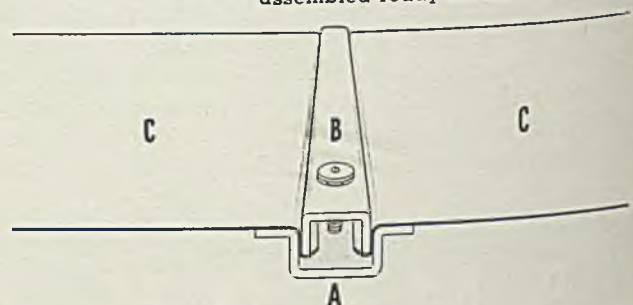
Here the units in Fig. 1 are assembled ready for tensing sheets
